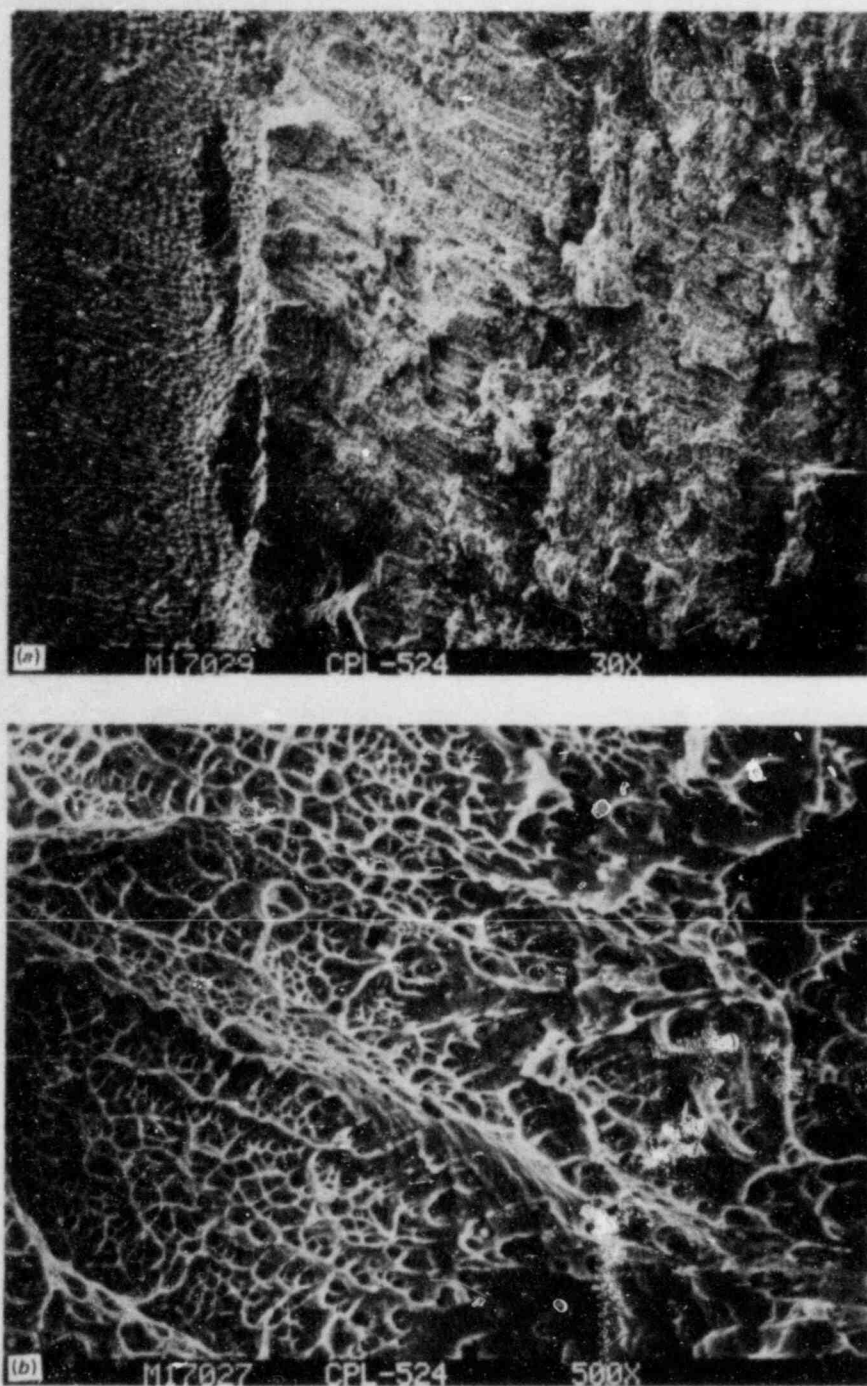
SEM of fracture surface of unirradiated nominally type 309 Charpy specimen CPL-524 tested at 177°C on upper shelf. (a) Low-magnification view of notch, type 309 weld layer, and type 308 weld layer each comprising roughly one-third of micrograph from left to right, respectively (30×); and (b) detail of type 309 weld layer showing fibrous fracture.
